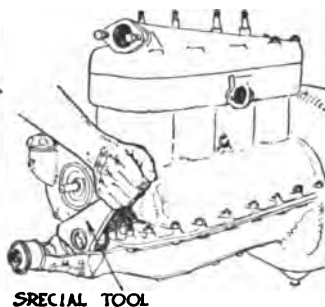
Method of using special bulldozing tool to expand front end of engine oil pan
